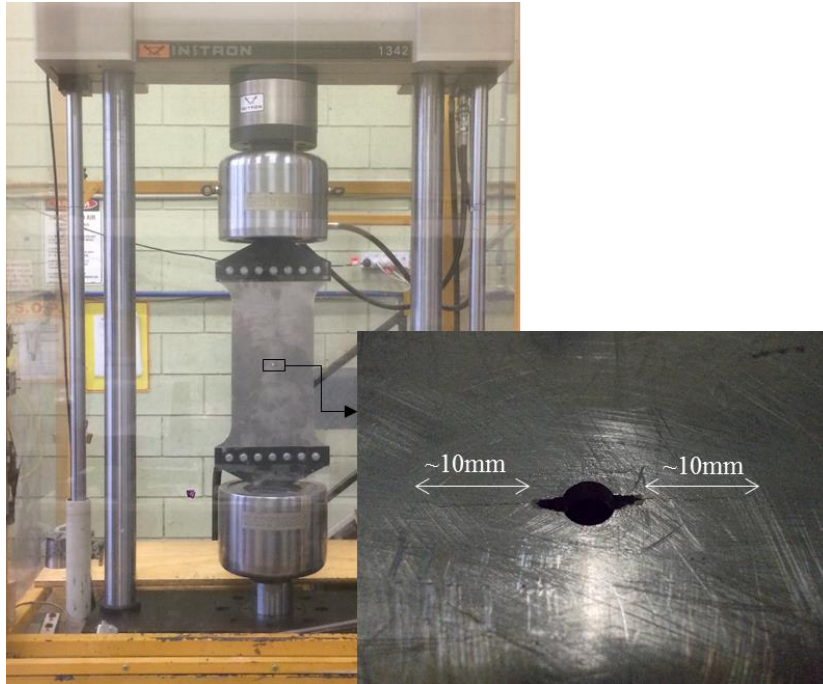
Fatigue testing using INSTRON and the fatigue crack generated at the end of the starter notches
